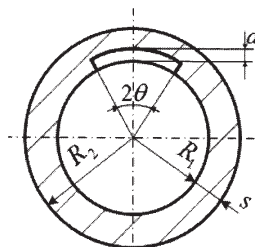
Section through tube specimen with rectangular circumferential crack on the inner surface
